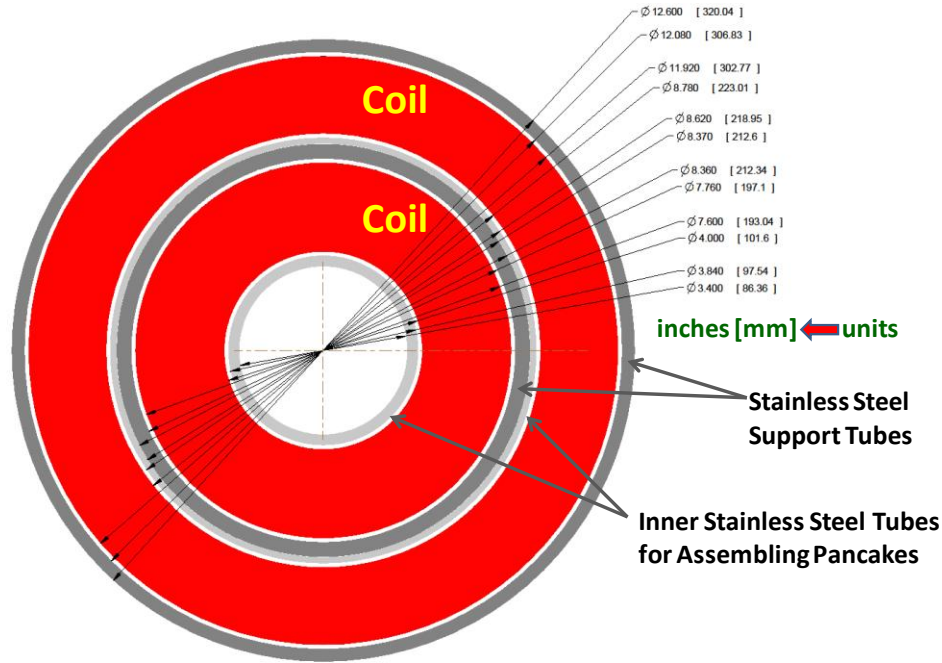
Cross section and nominal radial dimensions of 1.7 MJ SMES coil design. Inner and outer pancakes are shown in red, inner tube in light gray and outer support tube in dark gray.
